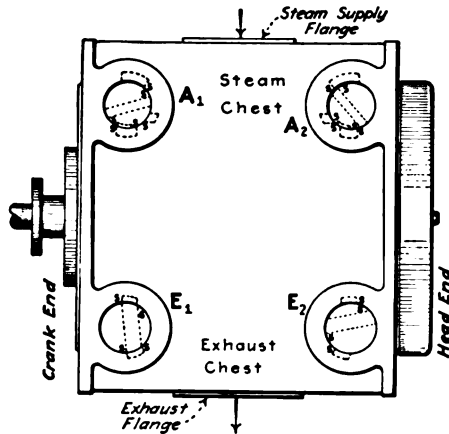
Exterior outline of Harrisburg four-valve engine.
